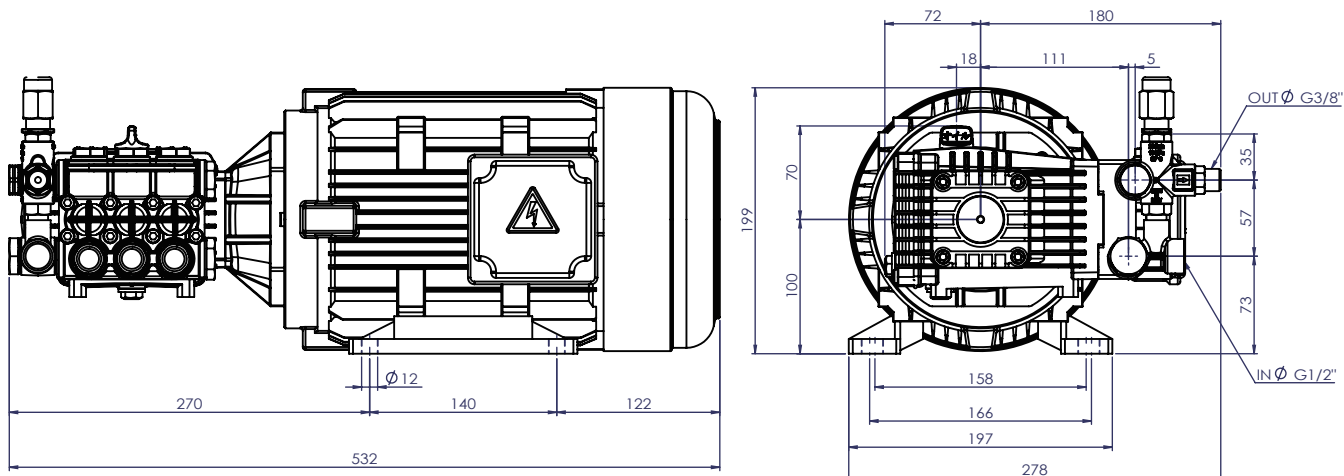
motor with overload protector. Die-casting aluminum. IE1 or IE3 are available.
